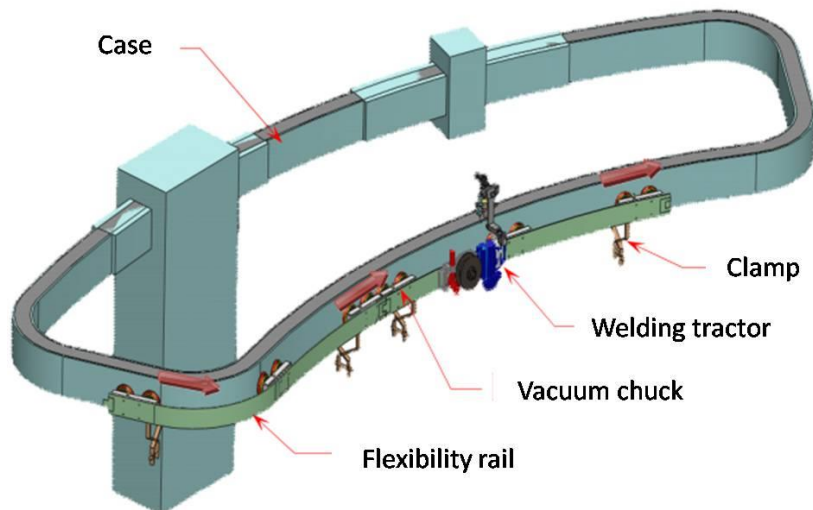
NG-TIG welding scheme for the BTCC case closure welding
